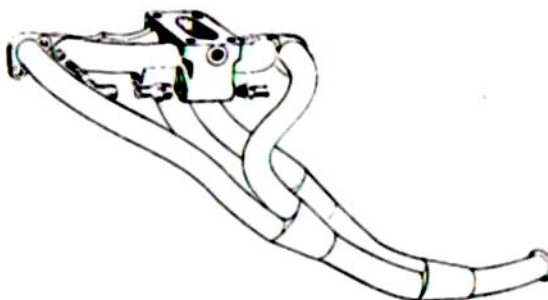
Exhaust manifold with extractor pipes; the inlet manifold has water heating
